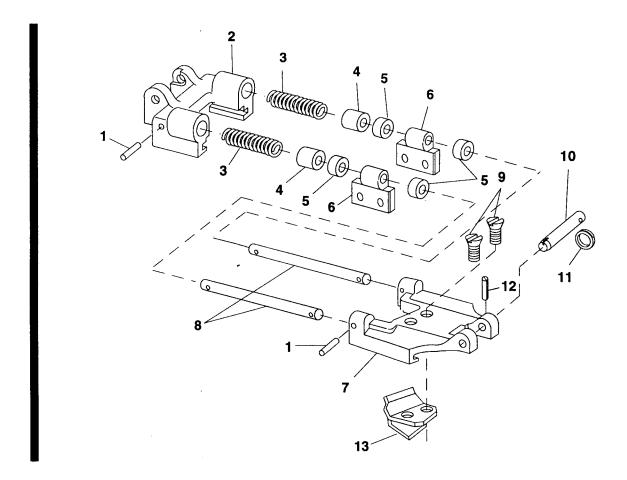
M240E1 Flexible Mount Assembly, 12597090; Flexible Mount Assembly, 12976940
